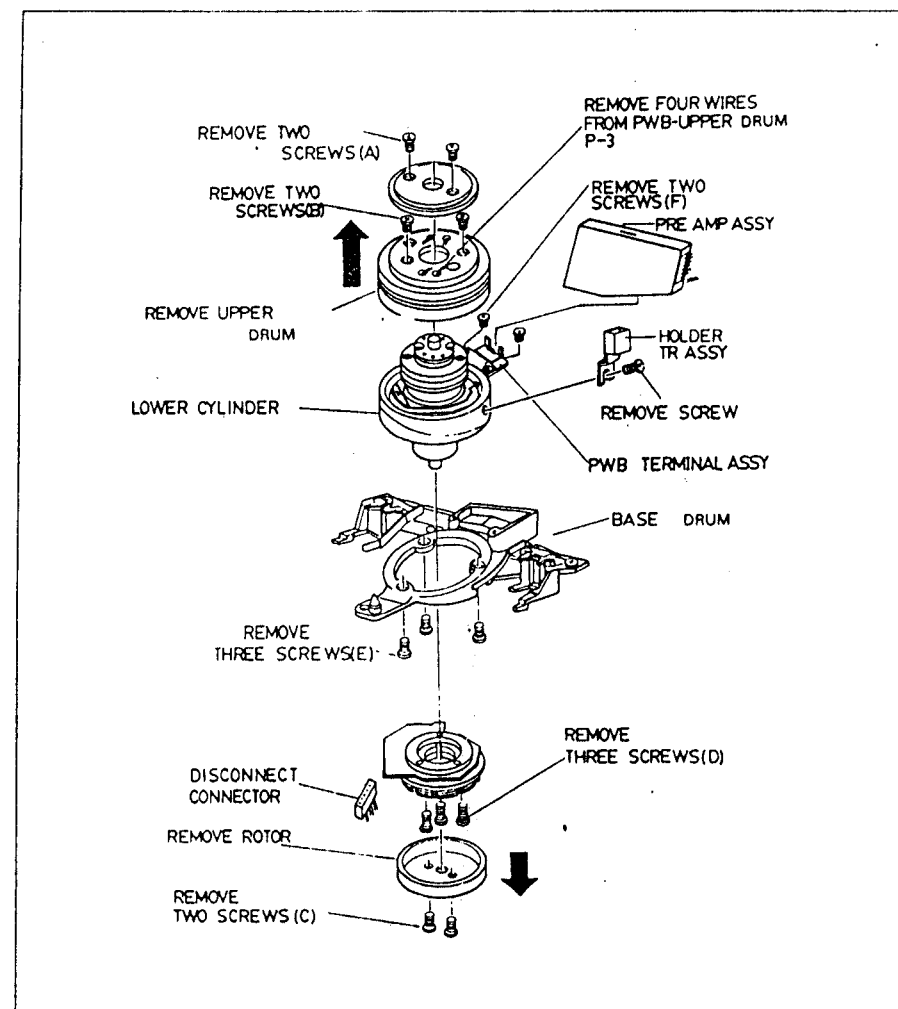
Video Head Removal and Drum Motor Assembly Removal.
